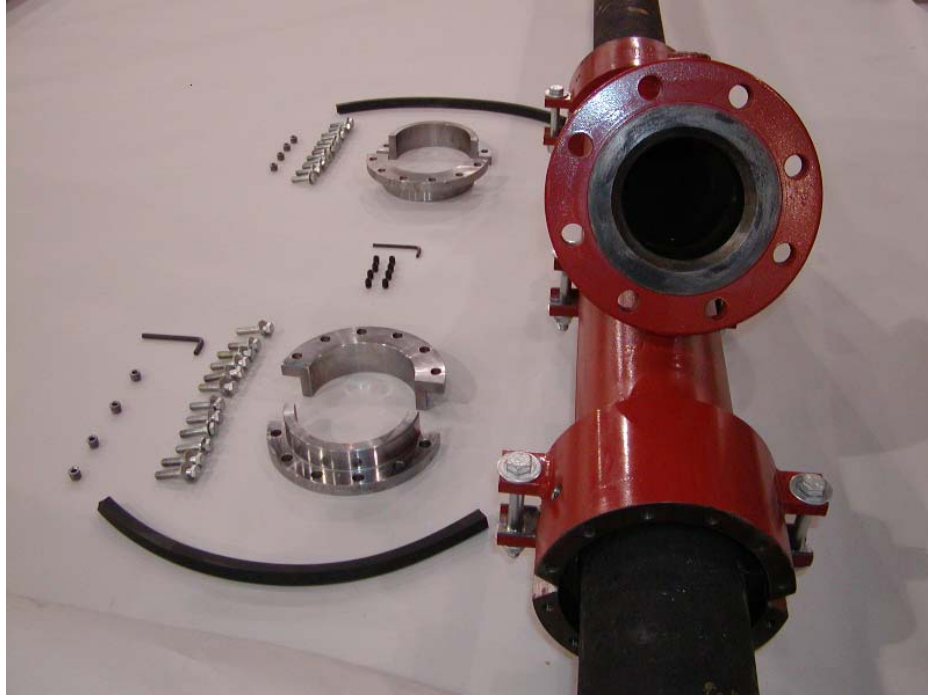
Cast Iron Entry Fitting (4-inch Prototype)
